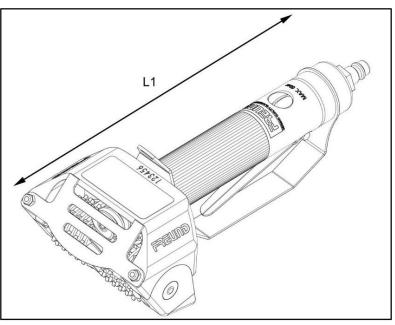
Mounted Hand-Skinner HSK8-P3_evo2
